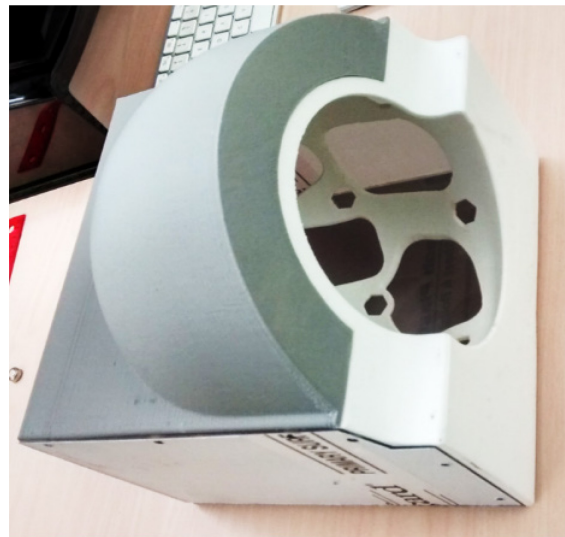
Picture of the coil housing with the spherical frame, which is also a part of the external assembly.
